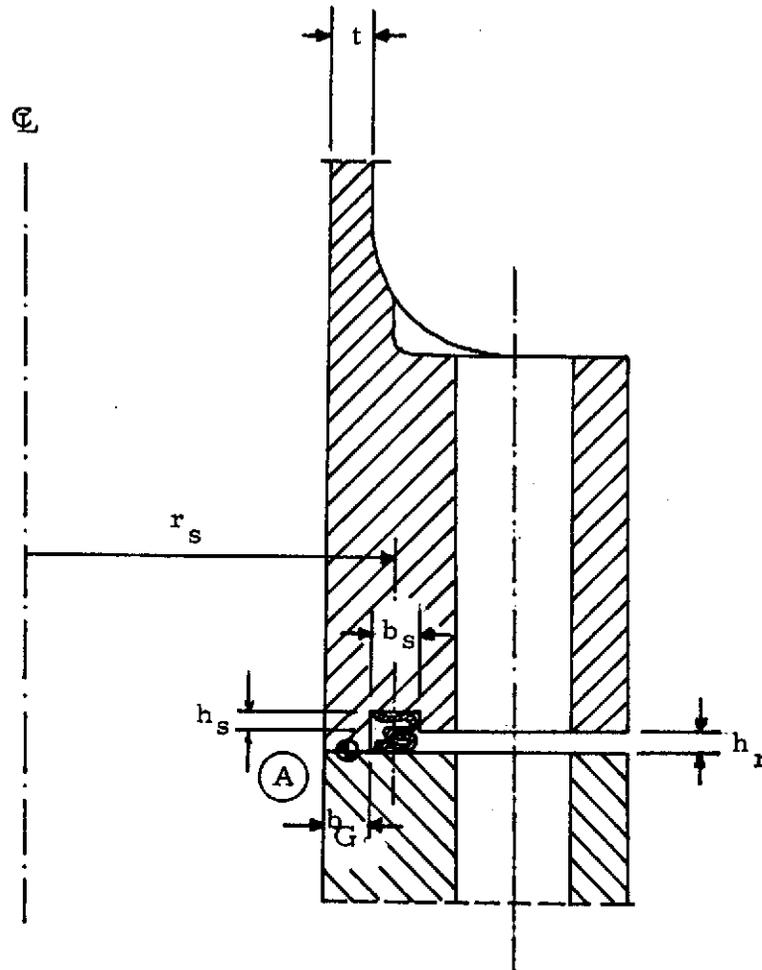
Cantilever Flange with Pressure Energized Seal
